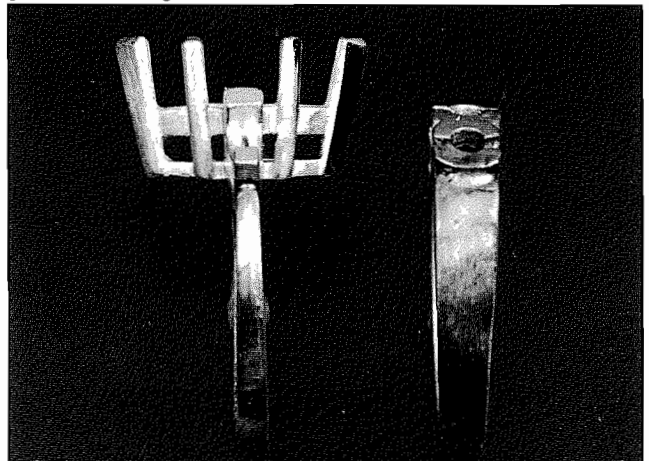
Assembled Pt-Co alloy pieces after soldering and prior to cleaning
